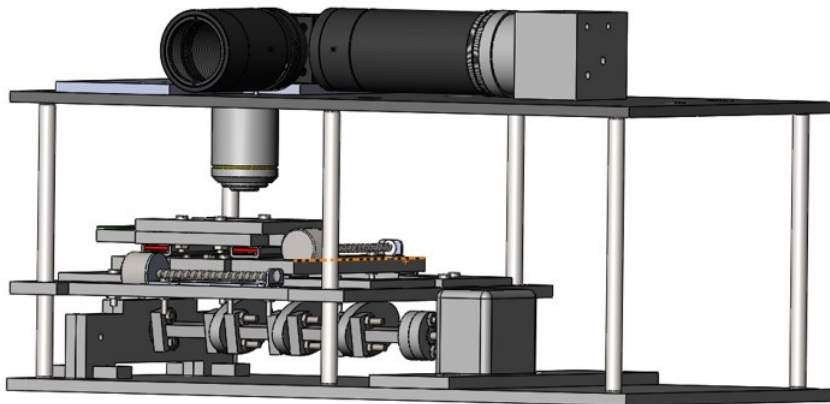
CAD Design of z-axis cam mechanism prototype
